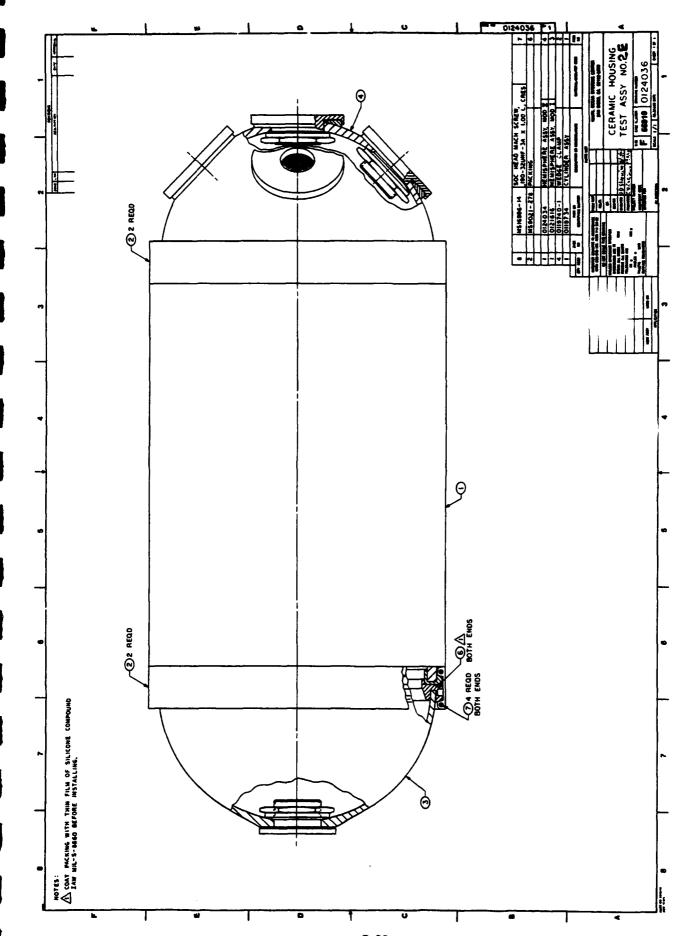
Ceramic housing test assembly 2E incorporating Mod 5 and Mod 1 ceramic bulkheads.
